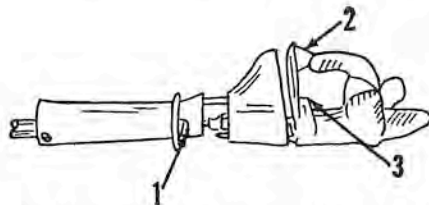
Partially disassembled view of the three-piece lower unit showing location of the two stud nuts (1 & 3) and the retaining screw (2) which hold lower unit together. Refer to text for disassembly procedure.
